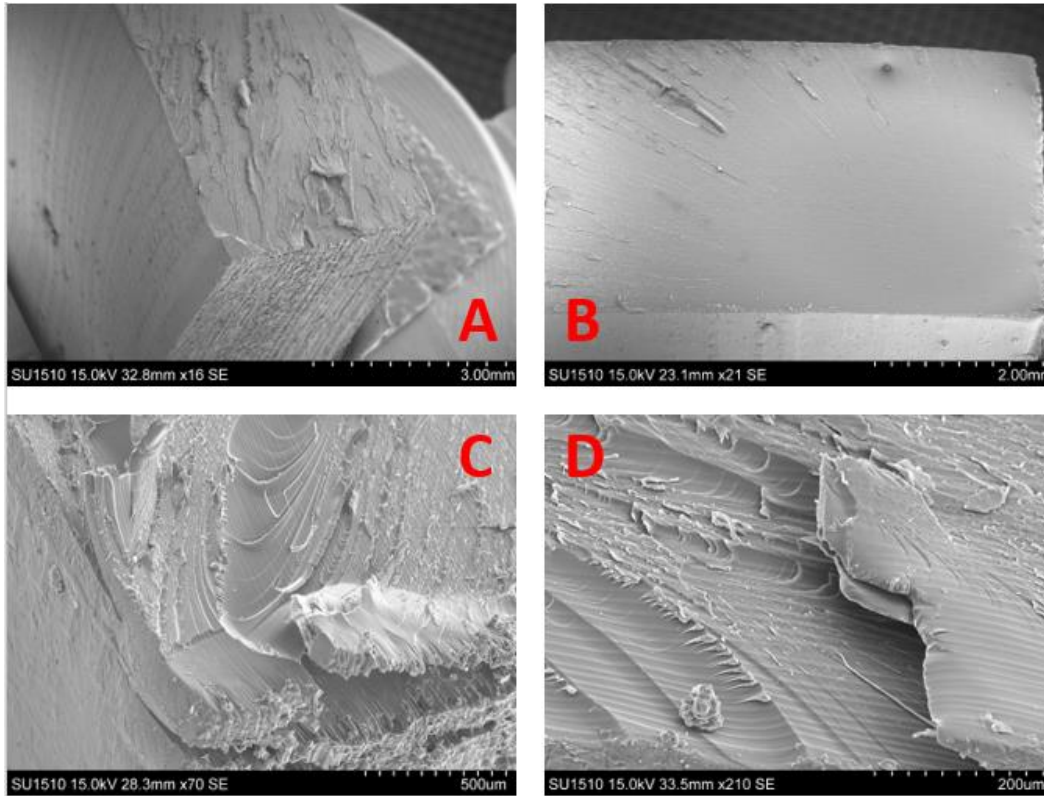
Broken surfaces of photopolymer resin manufactured by an Objet Eden 350V after tensile test, A: layered structure is well visible, B: radial break when load applied perpendicular to layer planes, C: layers tear when those are loaded in the plane of themselves, D: a structure which reveals crack propagation
